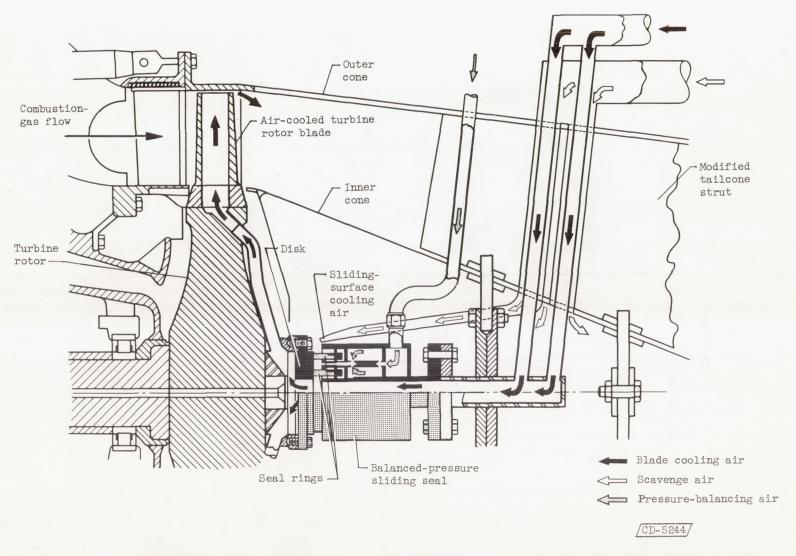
Balanced-pressure sliding seal installed in tailcone of turbojet engine modified for turbine-cooling research.
